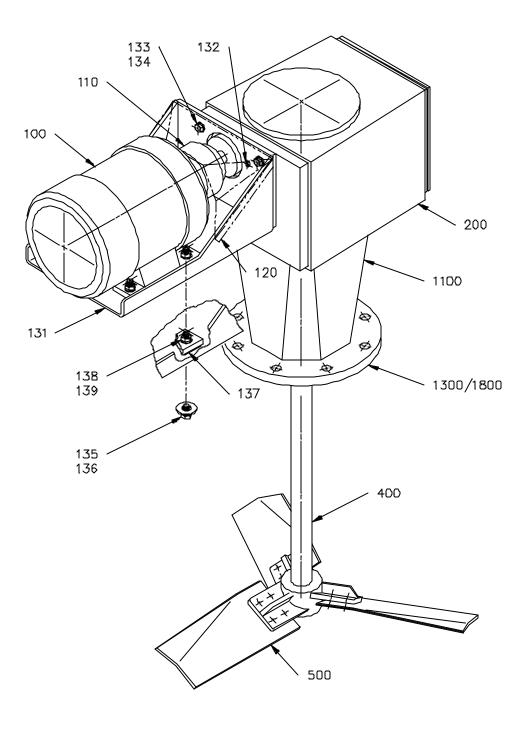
Model HTA, HTAL, HTL Agitator Assembly
